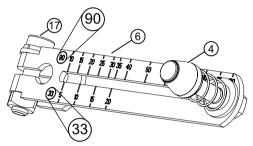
Long lever 6DR4004-8L with mounted carrier pin 4 and cylinder head screw 17
